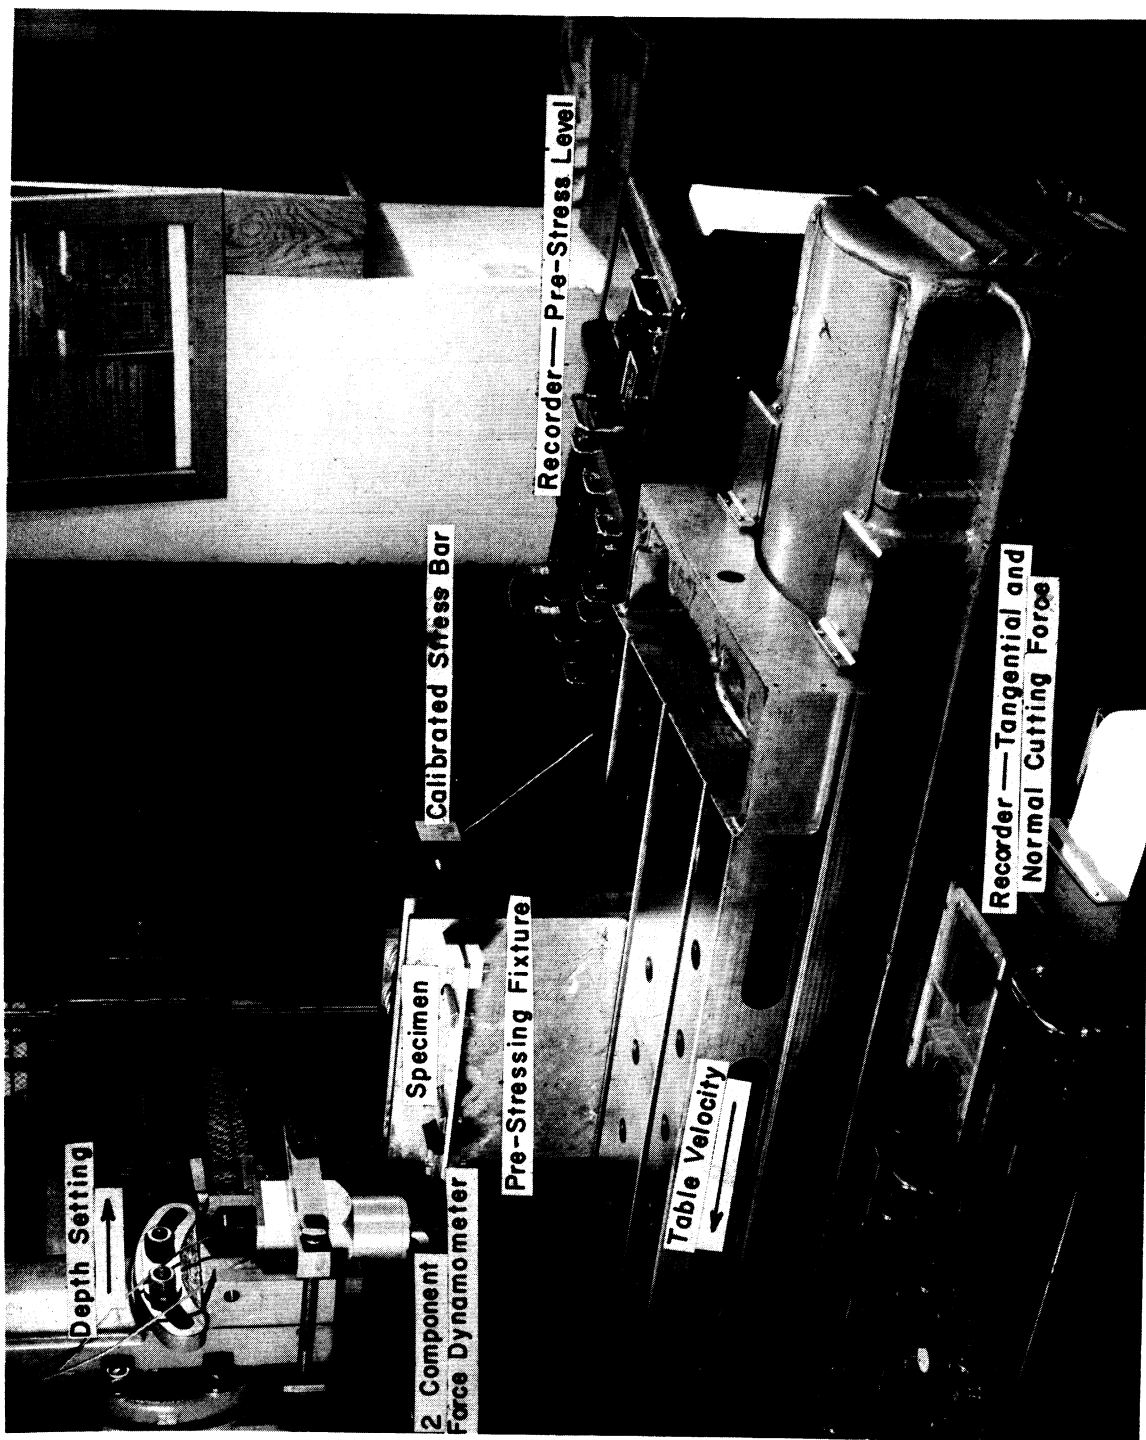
Rockford hydraulic planer equipped with a two-component cutting-force dynamometer and workpiece prestressing fixture. A spring-induced bending load provides either tensile or compressive stresses in surface being cut.
